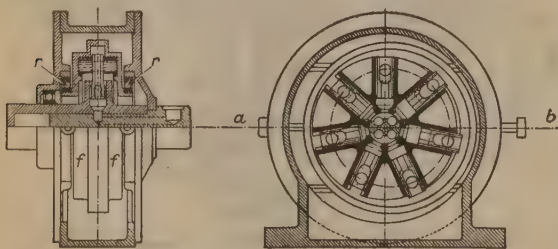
Two views of the Hele-Shaw radial stroke pump.
